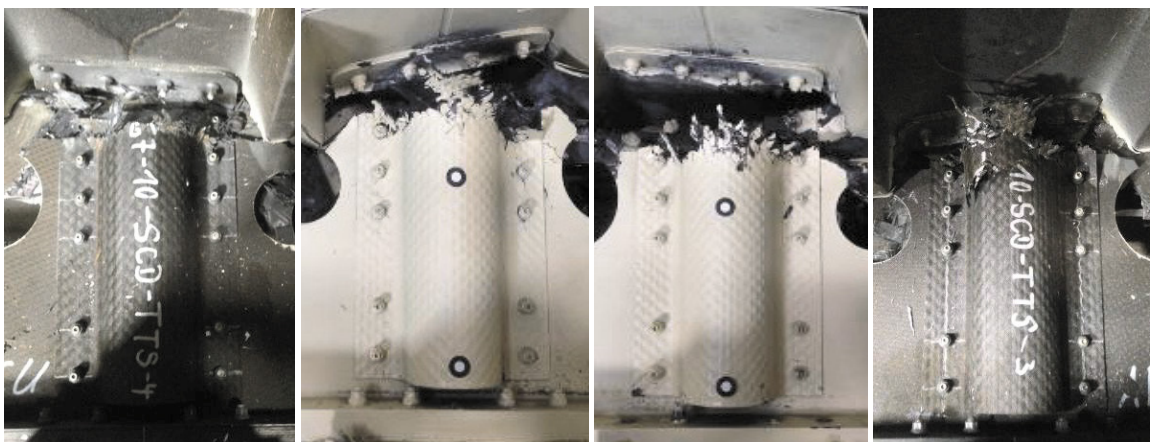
TTS components after test (a) Rear left; (b) Front left; (c) Front right; (d) Rear right.
